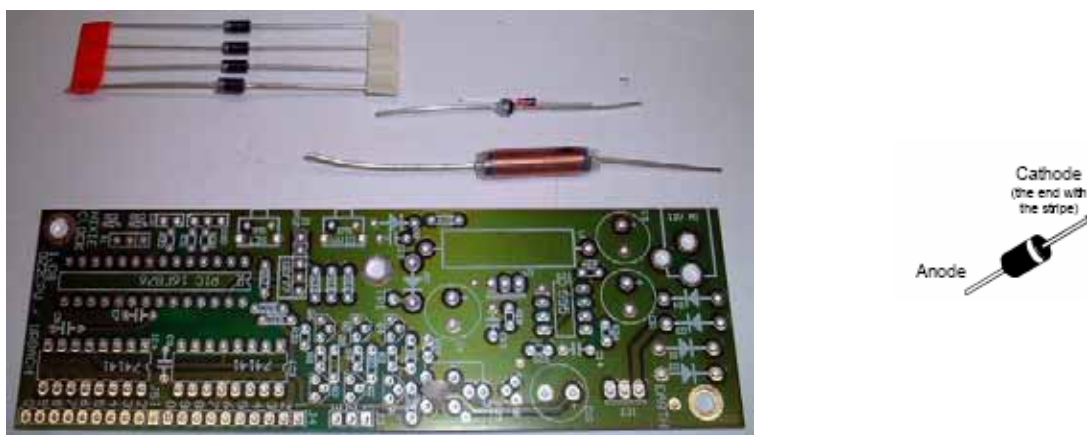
The clock PCB V1.08 with the diodes and coil – watch out for the ring
